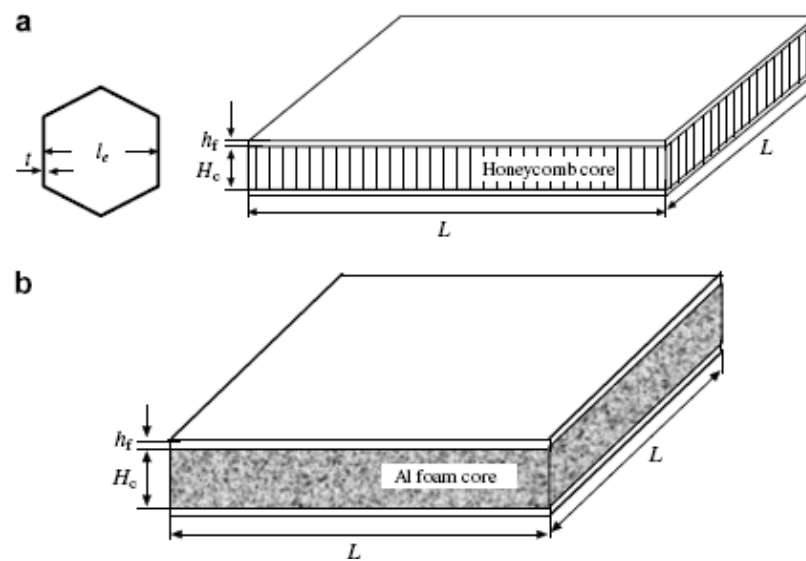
Blast test specimen configurations (a) Honeycomb core sandwich panel,(b) Al foam core sandwich panel (Source: Zhu, 2008).
